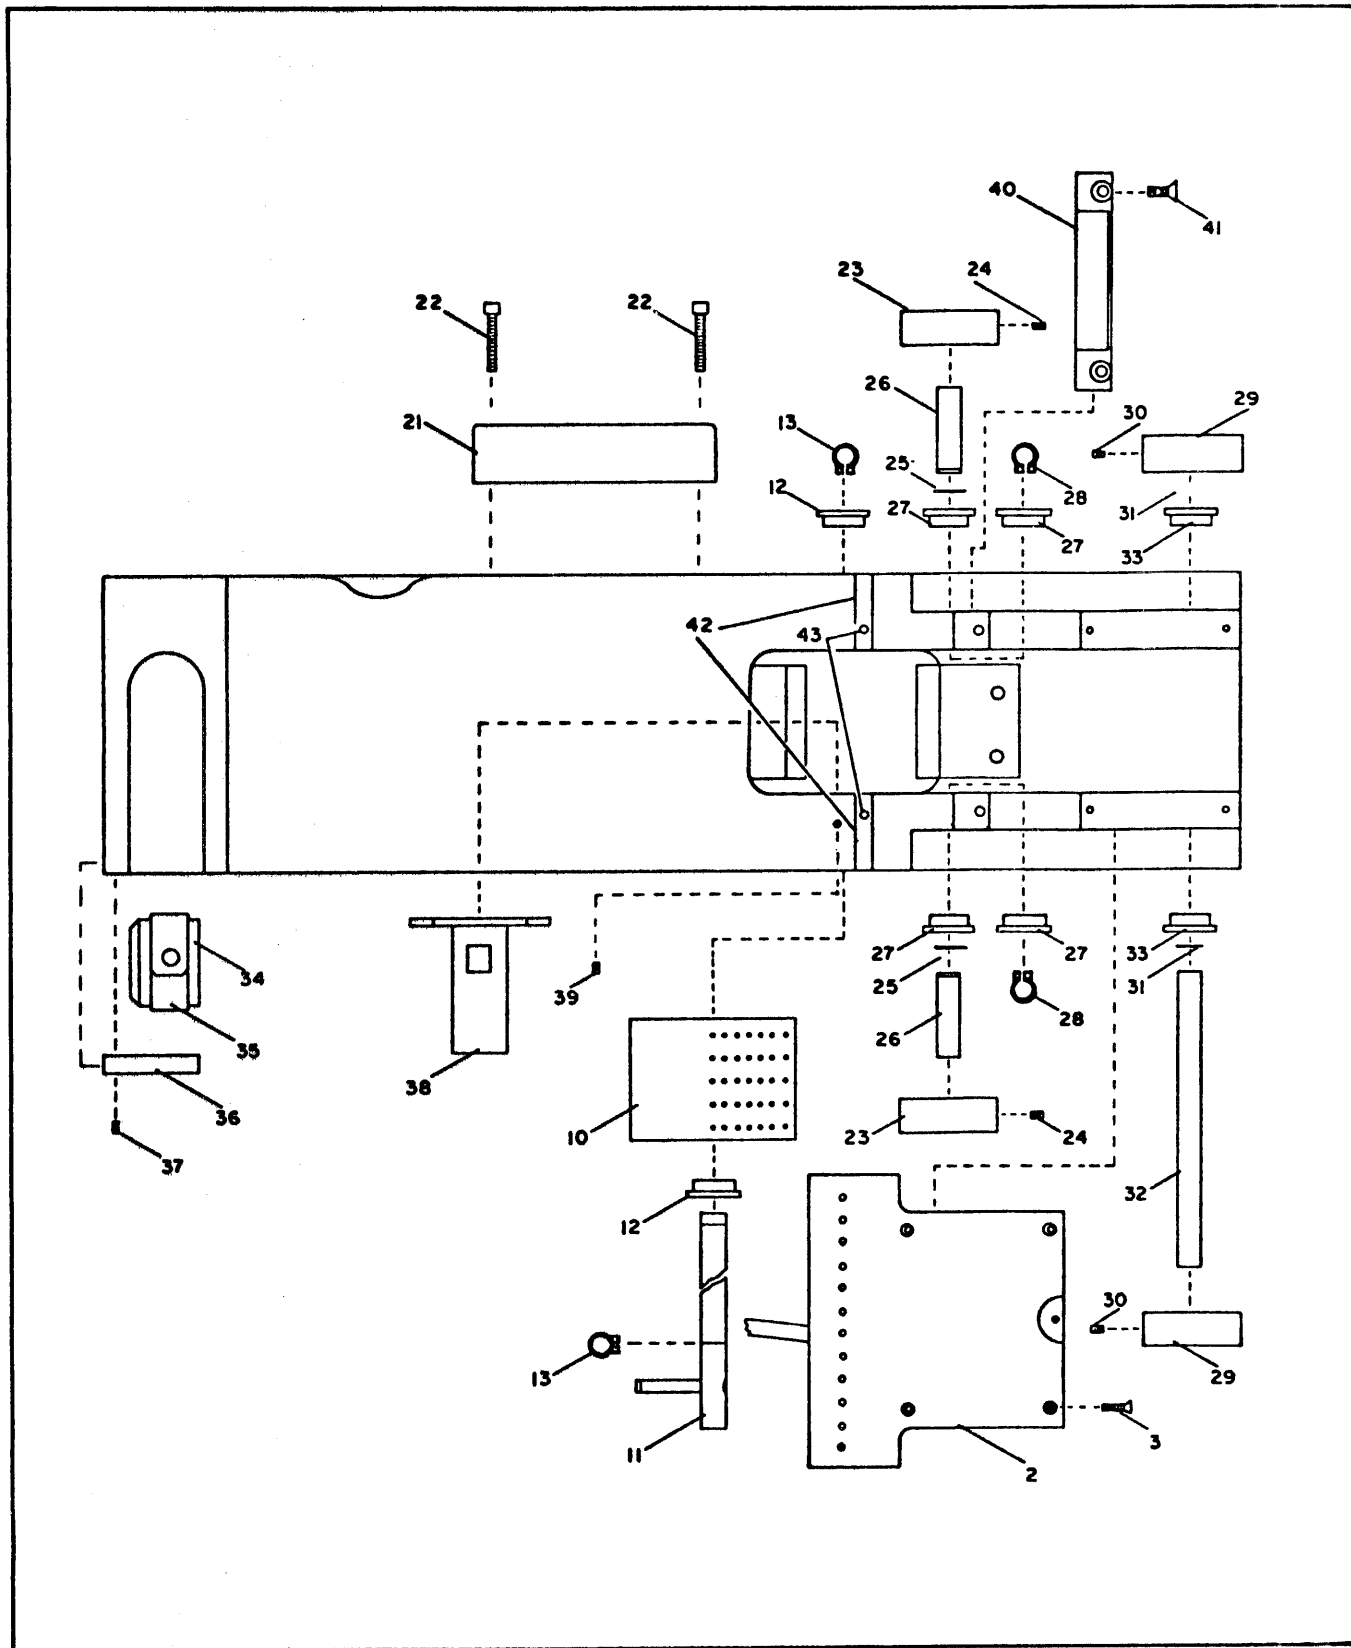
PICK SUPPORT ASSEMBLY (sheet 1 of 2)
